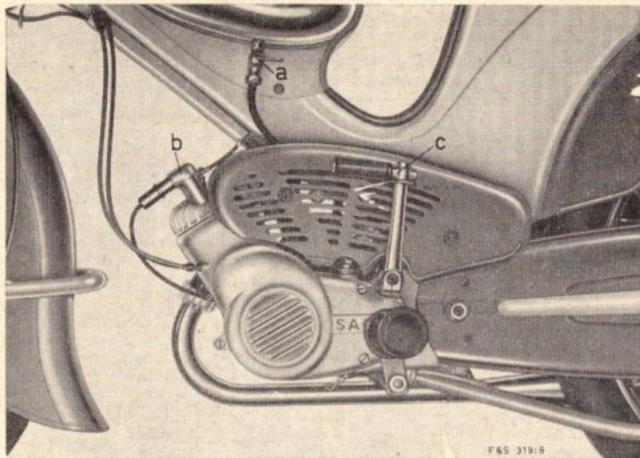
a = petrol tap b = sparking plug connector c = kick-starter
